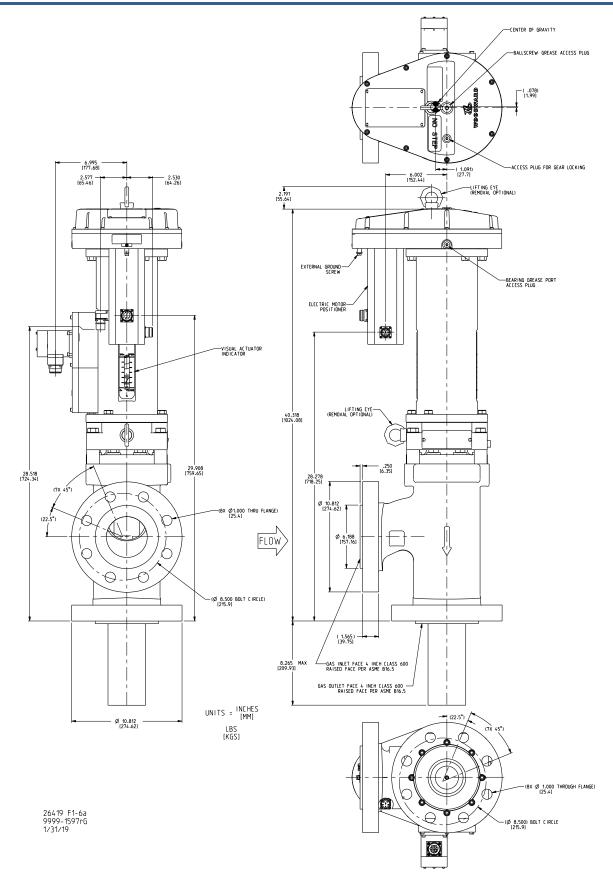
Outline Drawing (4-Inch LESV Class 600)
